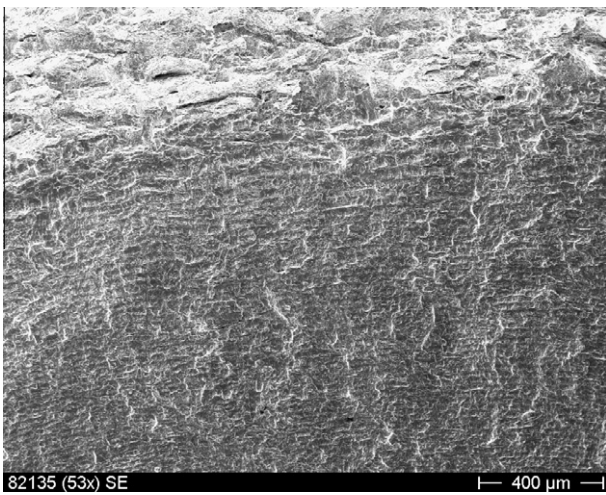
Detail of the fracture surface of specimen P09A, which was tested under combined LCF/HCF loading. Striations are clearly visible in front of the transition to residual fracture.
